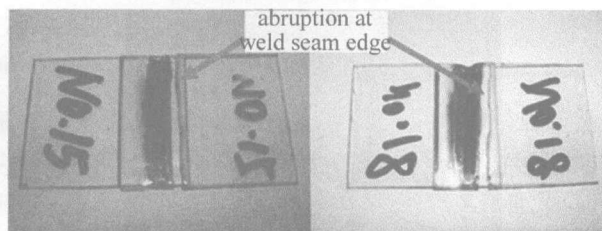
The sample was broken at the edge of the weld seam
